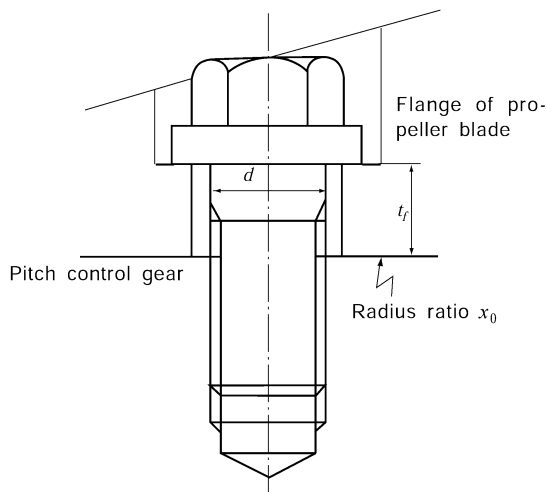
Measuring Method of Blade Fixing Bolt Dimension
